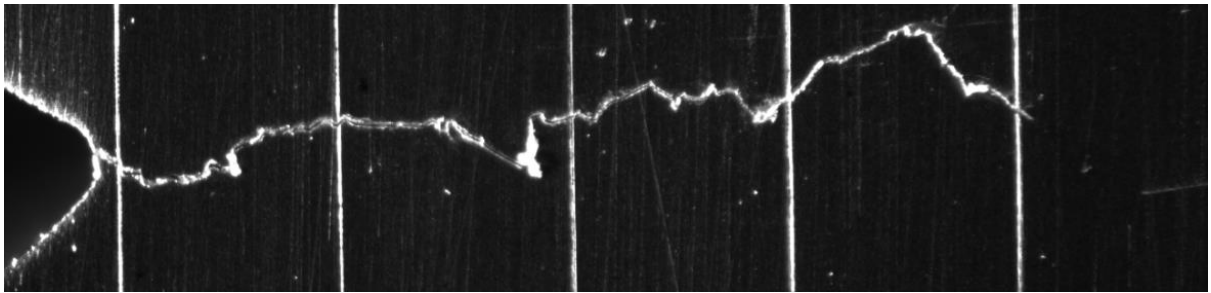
XY3 fatigue crack (initial)
